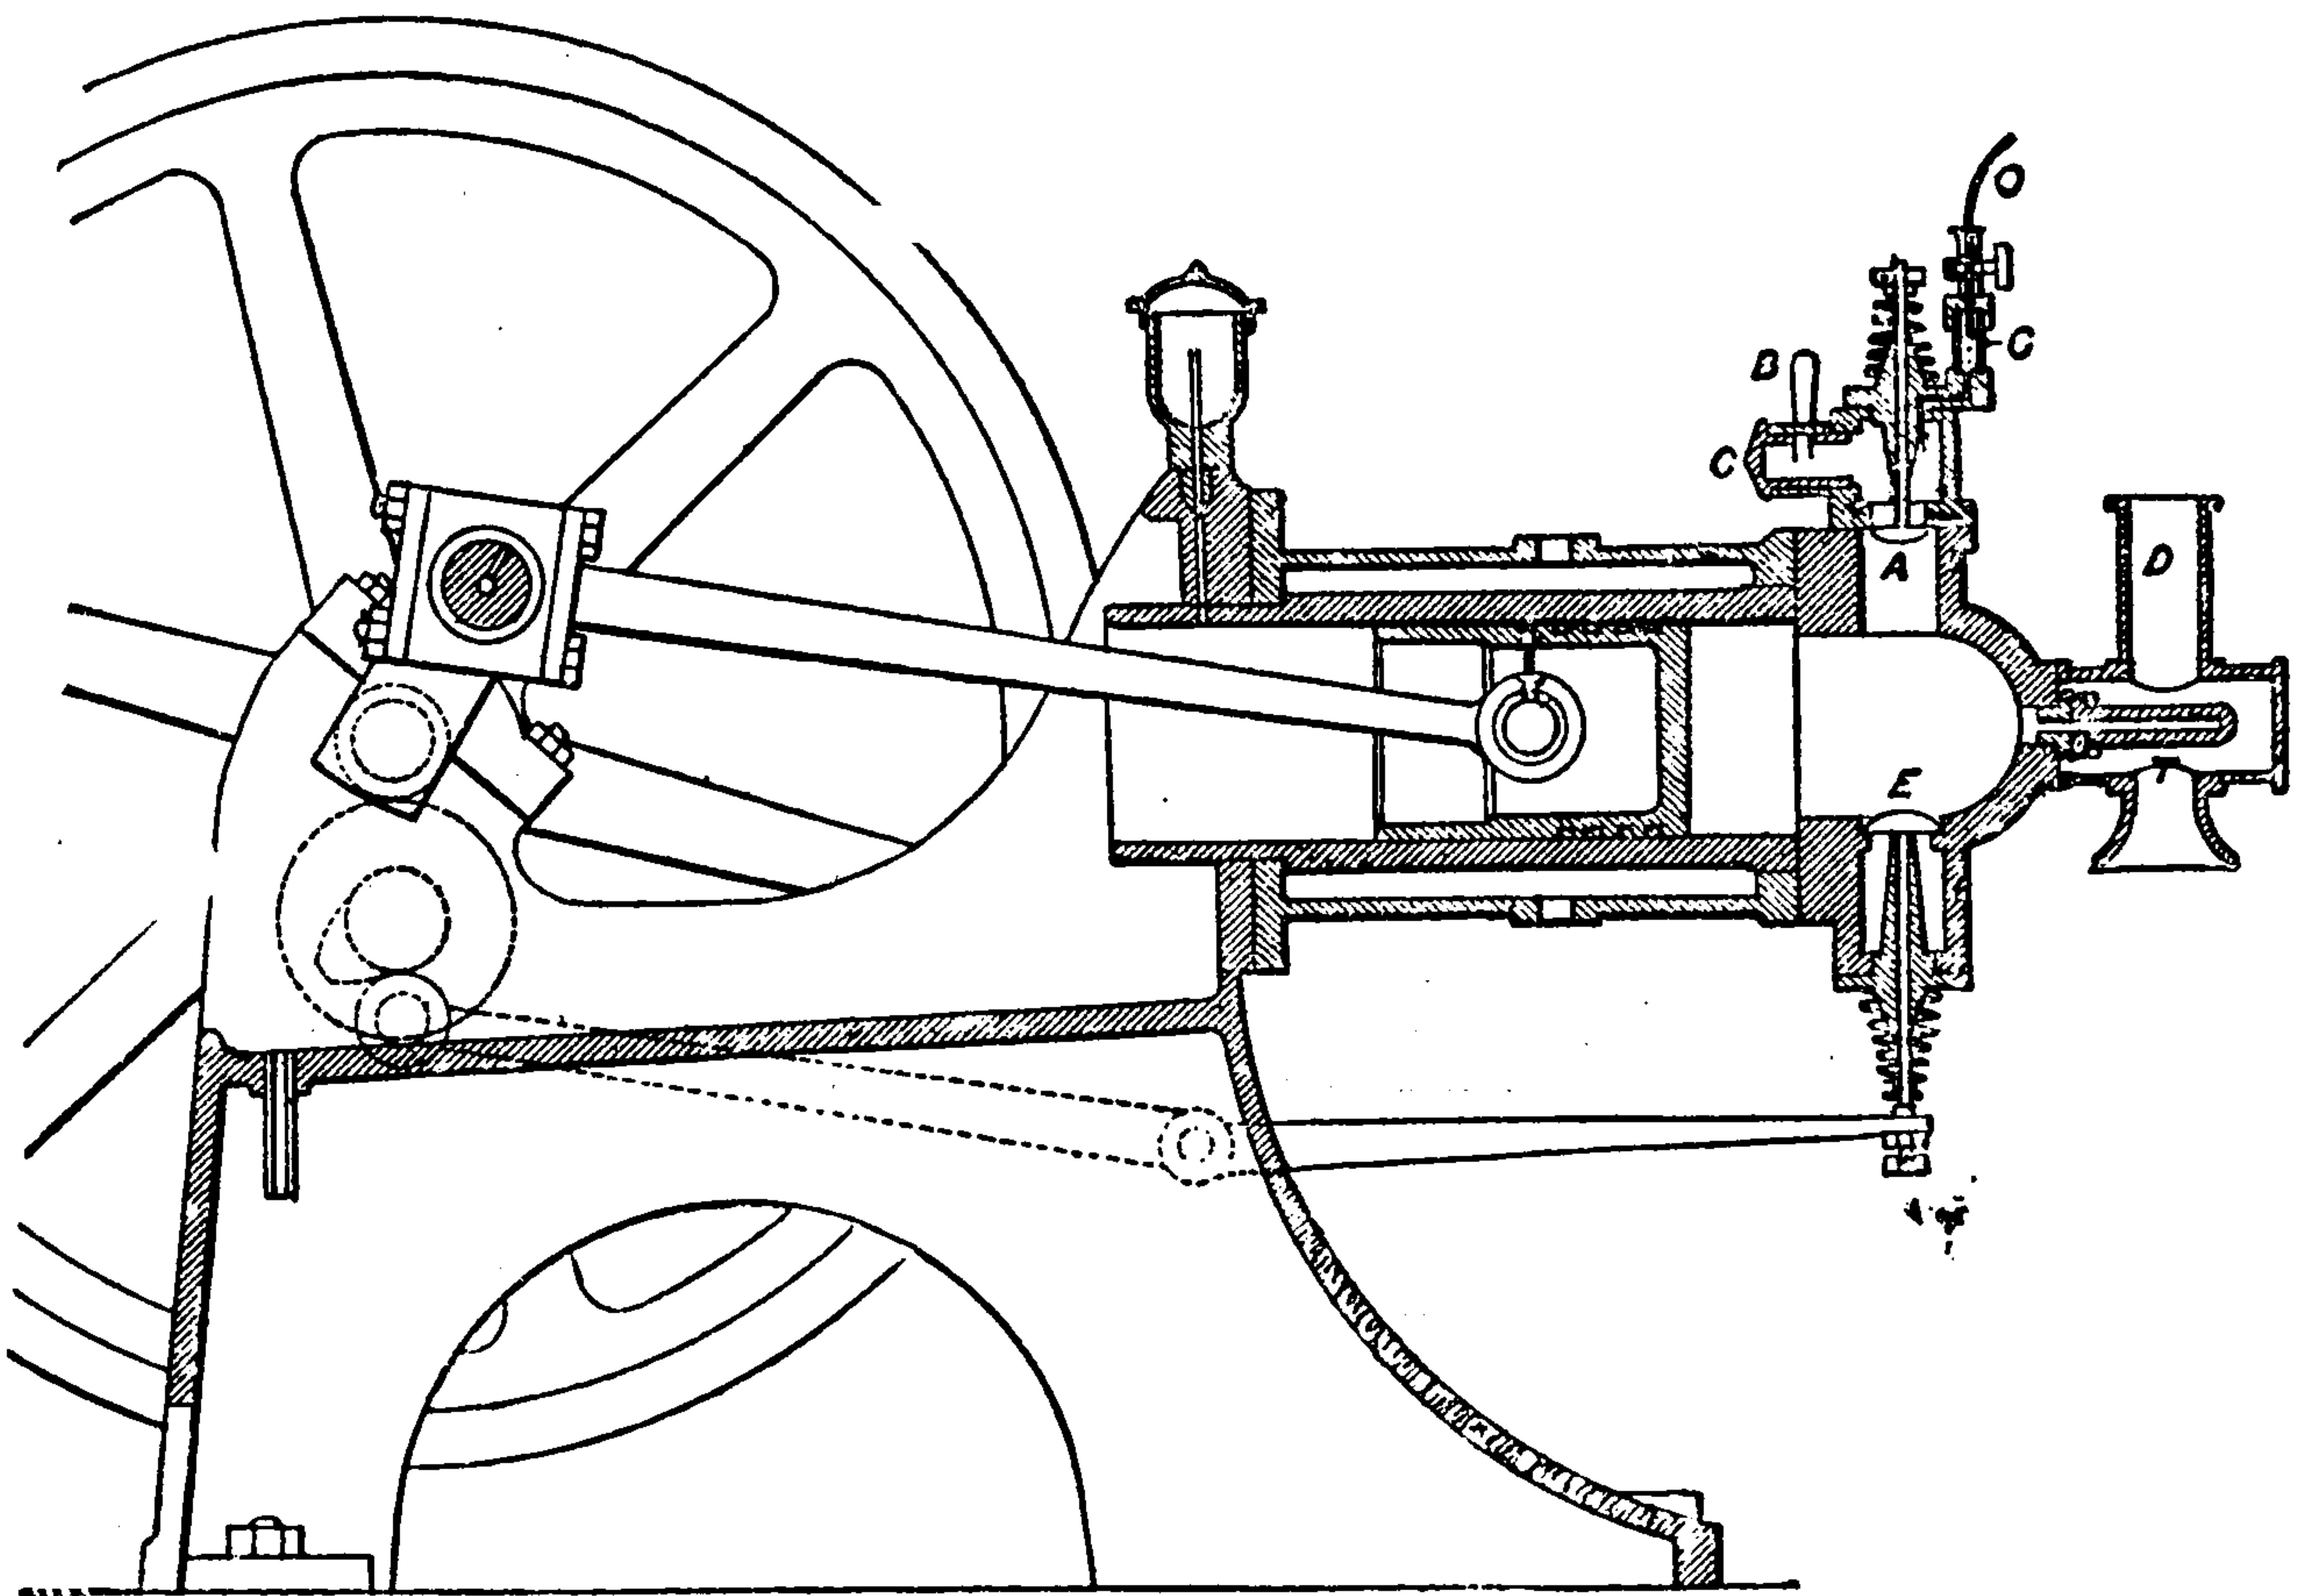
SECTION OF THE PETTER GASOLINE ENGINE.
